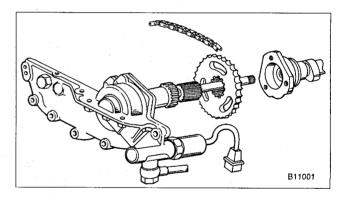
VANOS (variable intake valve timing) system used on M52 engine. When solenoid is actuated, oil pressure is directed to front side of gear cup piston. This forces gear cup into camshaft to advance intake valve timing.
